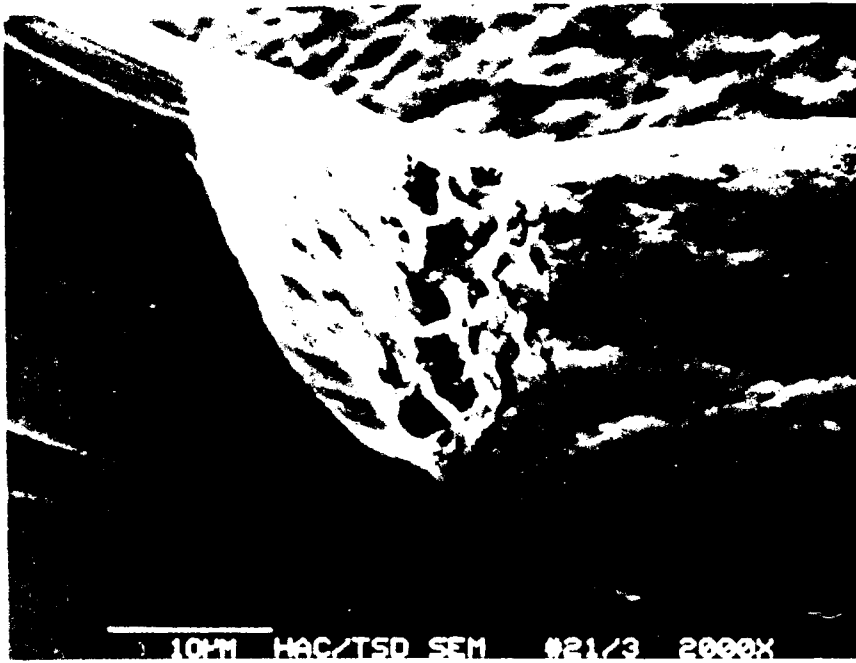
View of Sample 21 Pin 3 Wire Bond Before Current Pulsing
